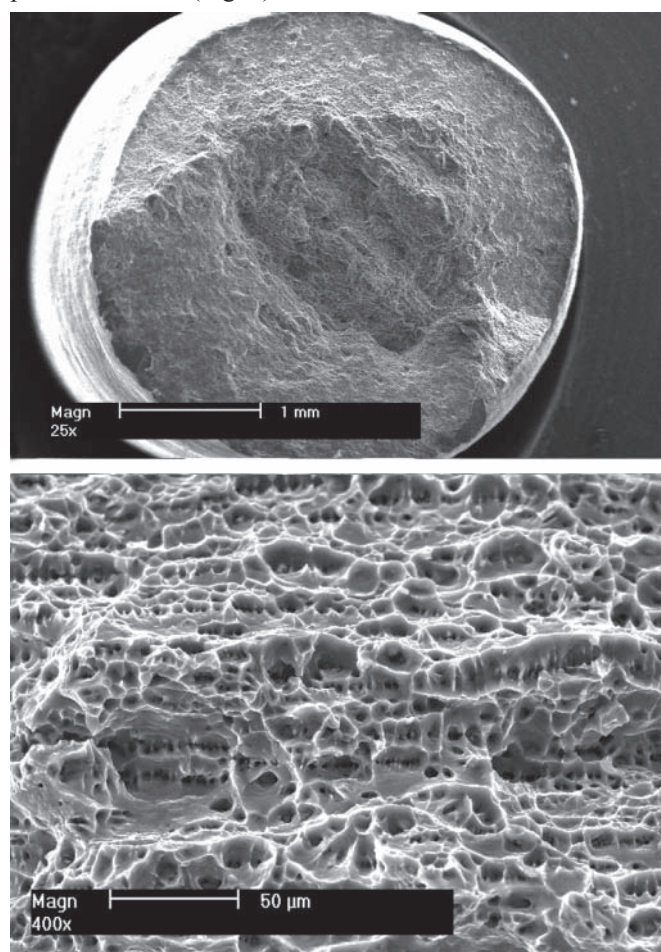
Fracture of AW-7020 alloy joint welded by FSW, achieved during SSR test
